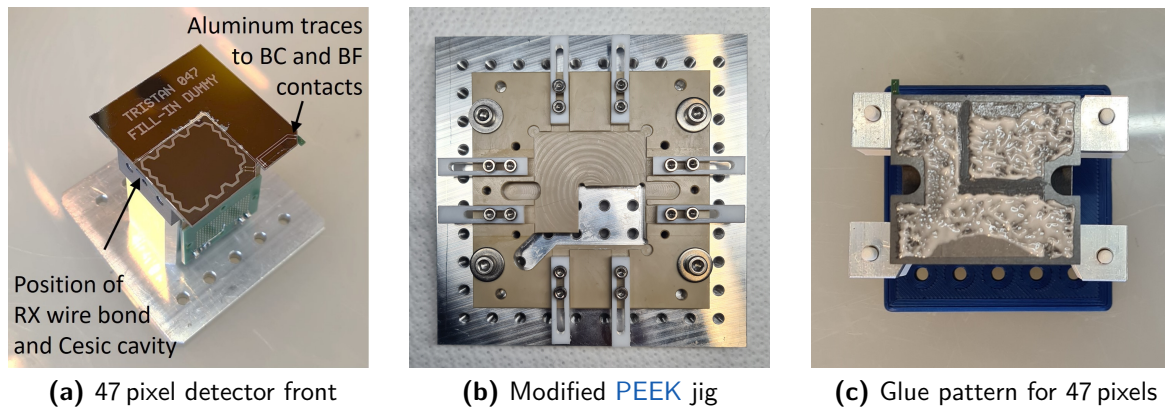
Assembly modifications for mounting a 47 pixel SDD chip
